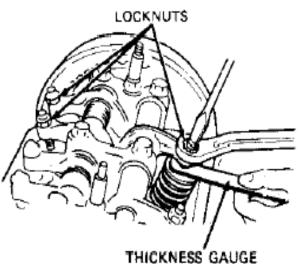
5 Adjustable Shaft-Mounted Rocker Arms
